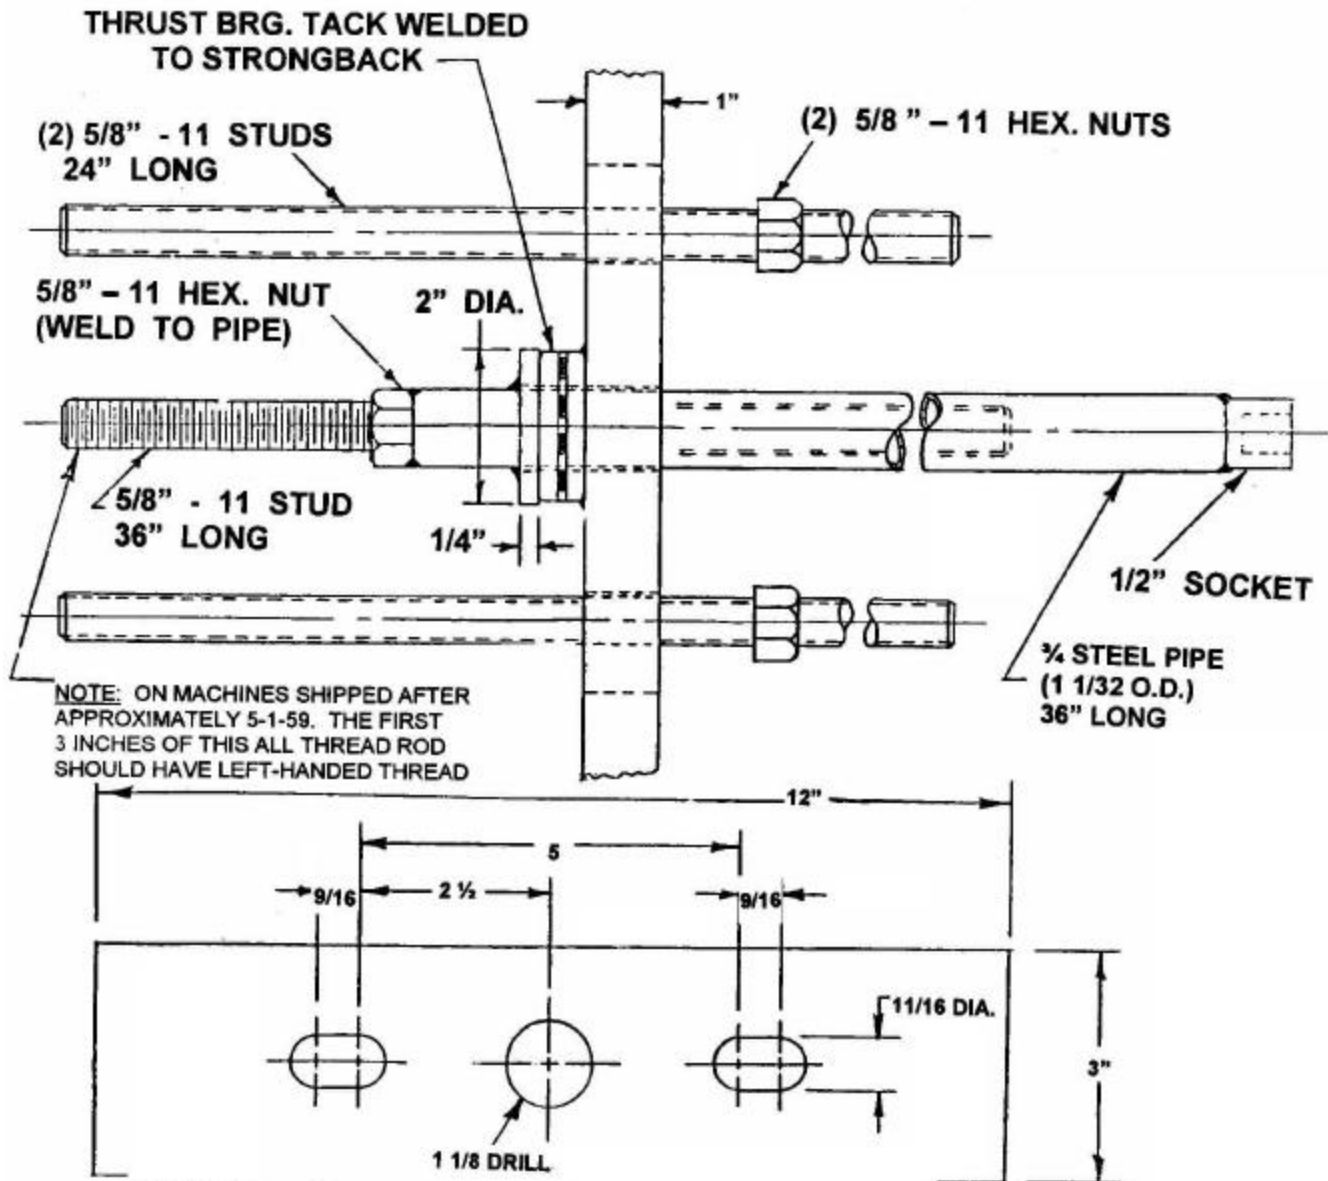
WHEEL PULLING ASSEMBLY 19C CENTRIFUGAL
